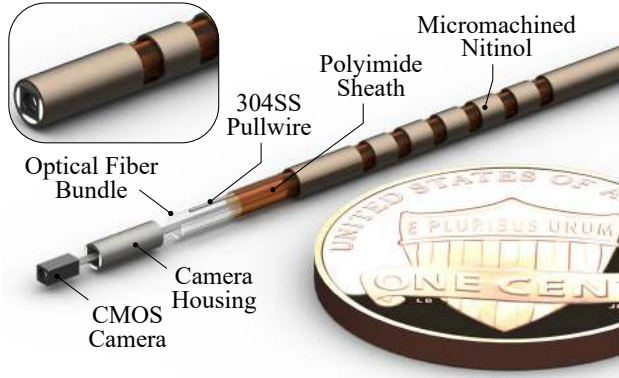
Exploded view of the steerable wrist sub-assembly (shown with a US penny for scale) where the inset shows the camera sub-assembly integrated into the Nitinol wrist.
